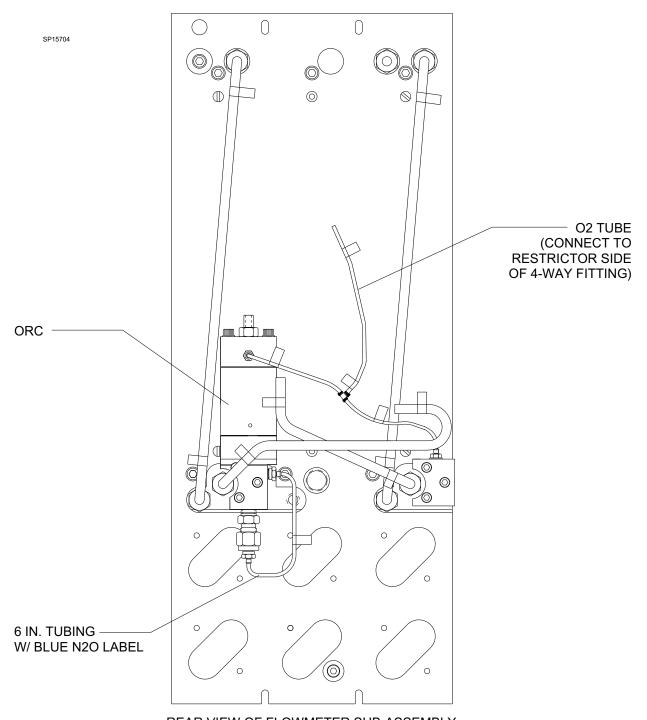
INSTALLATION OF NEW ORC AND TUBING
